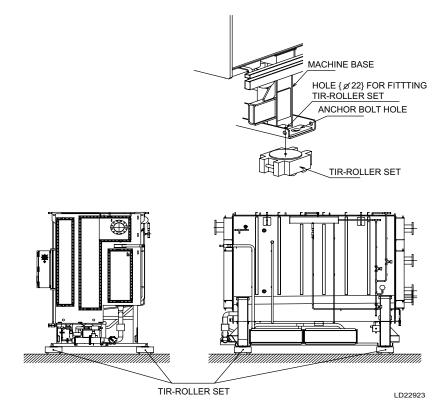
FITTING TRI-ROLLERS TO THE MACHINE
